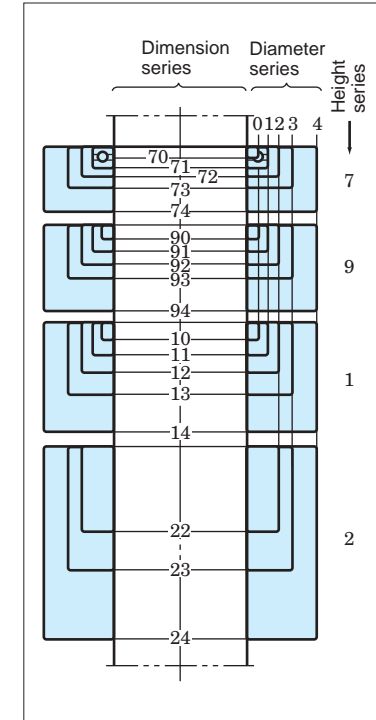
Thrust bearing dimension series diagram (diameter series 5 omitted)
